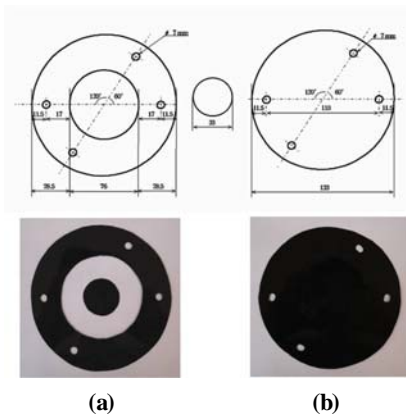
Dimensions of reference and load specimens for EMI shielding effectiveness test (a) Reference (b) Load
